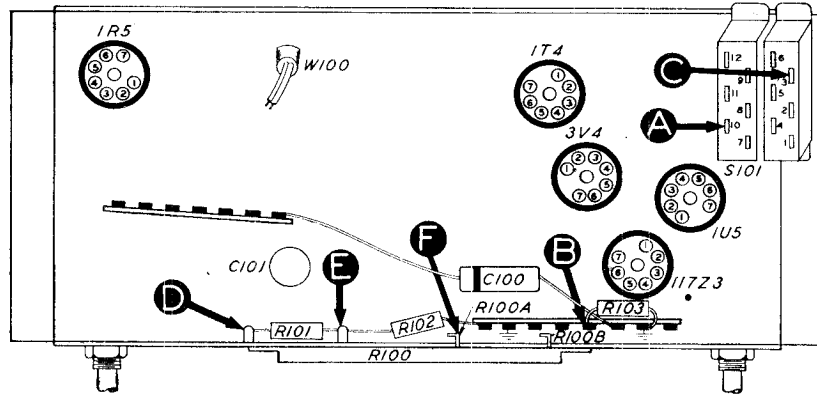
BOTTOM VIEW, SHOWING SECTION 1 TEST POINTS
